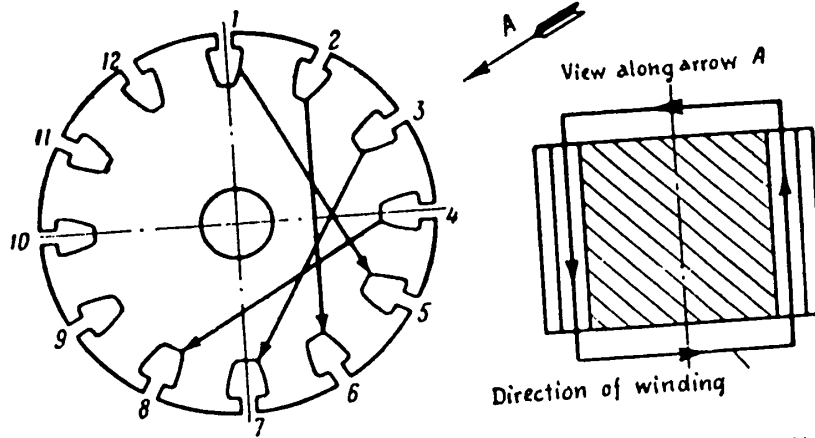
Schematic Sketch of the Winding Process of a Single-Chord Winding.
